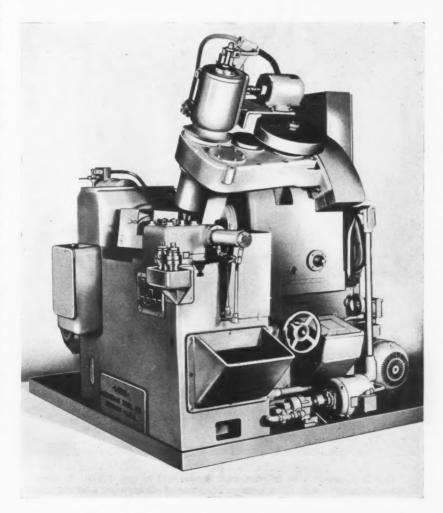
Side view of gear-hobbing machine illustrated in Fig. 1, showing large chip removal opening
